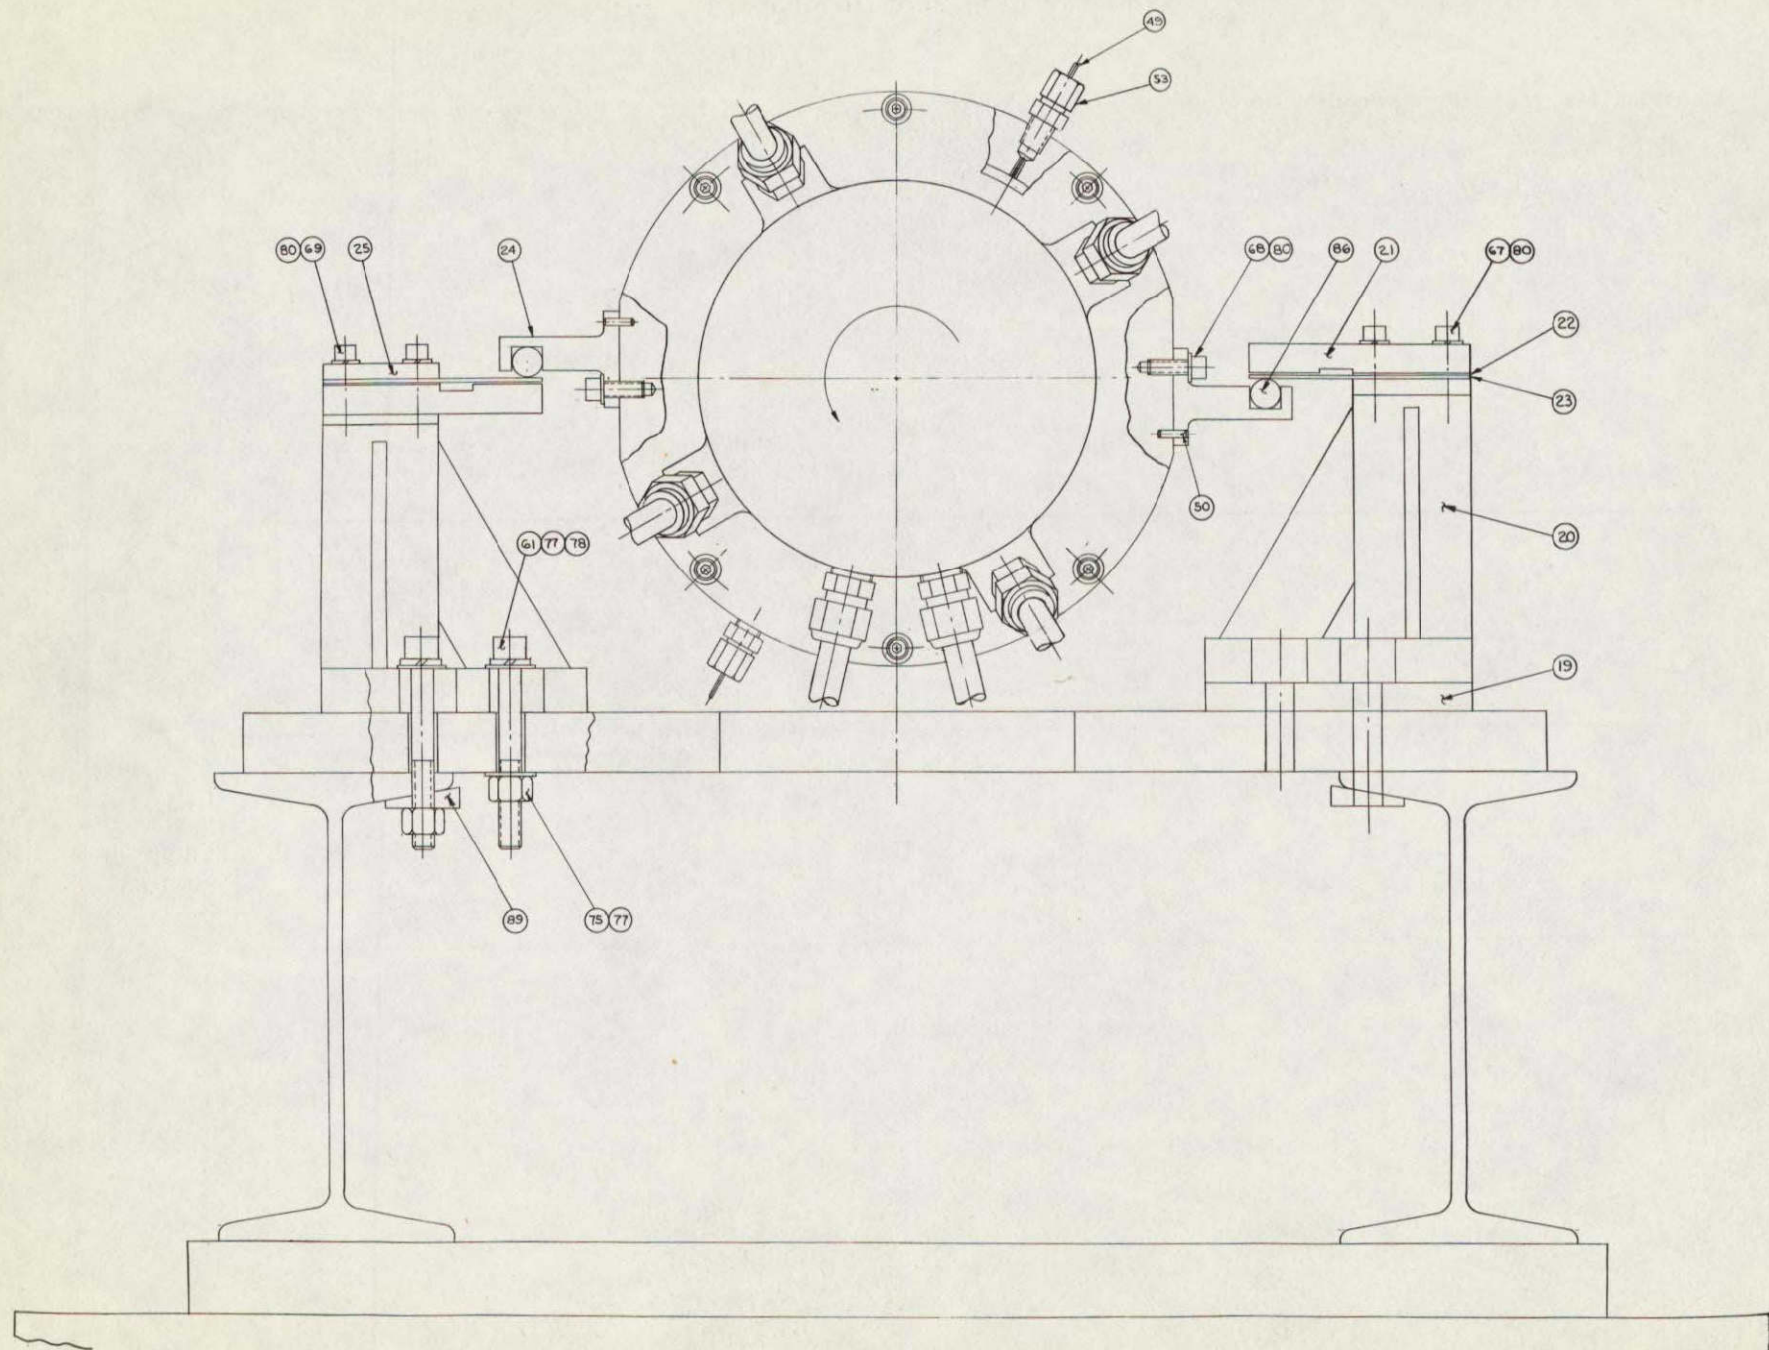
Test Head End View Showing Oil Supply Lines and Torque Arms
